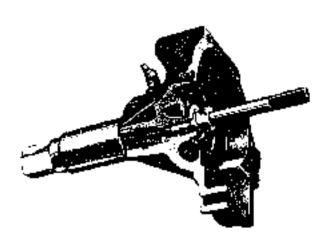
Removing Water Fump Shalt Bushings with Tool C-373 (1936-42 Models)
